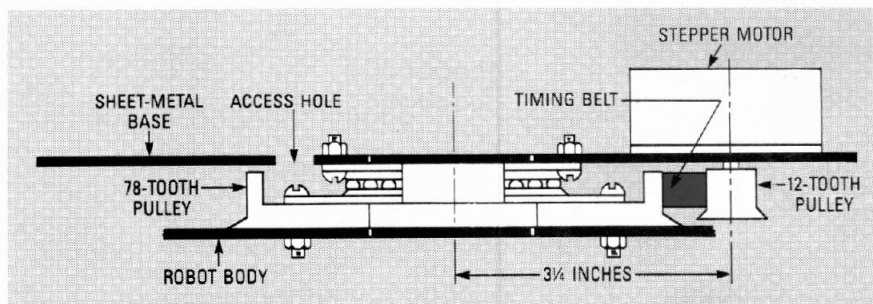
THE HEAD UNIT mounts on a 78-tooth pulley. The pulley is secured to the base unit and does not rotate; instead the head rotates around it.
